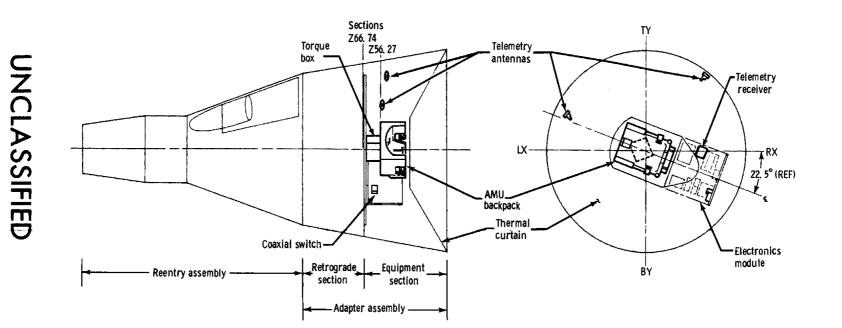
, 1-18. - Experiment D-12, AMU stowage in adapter assembly.
